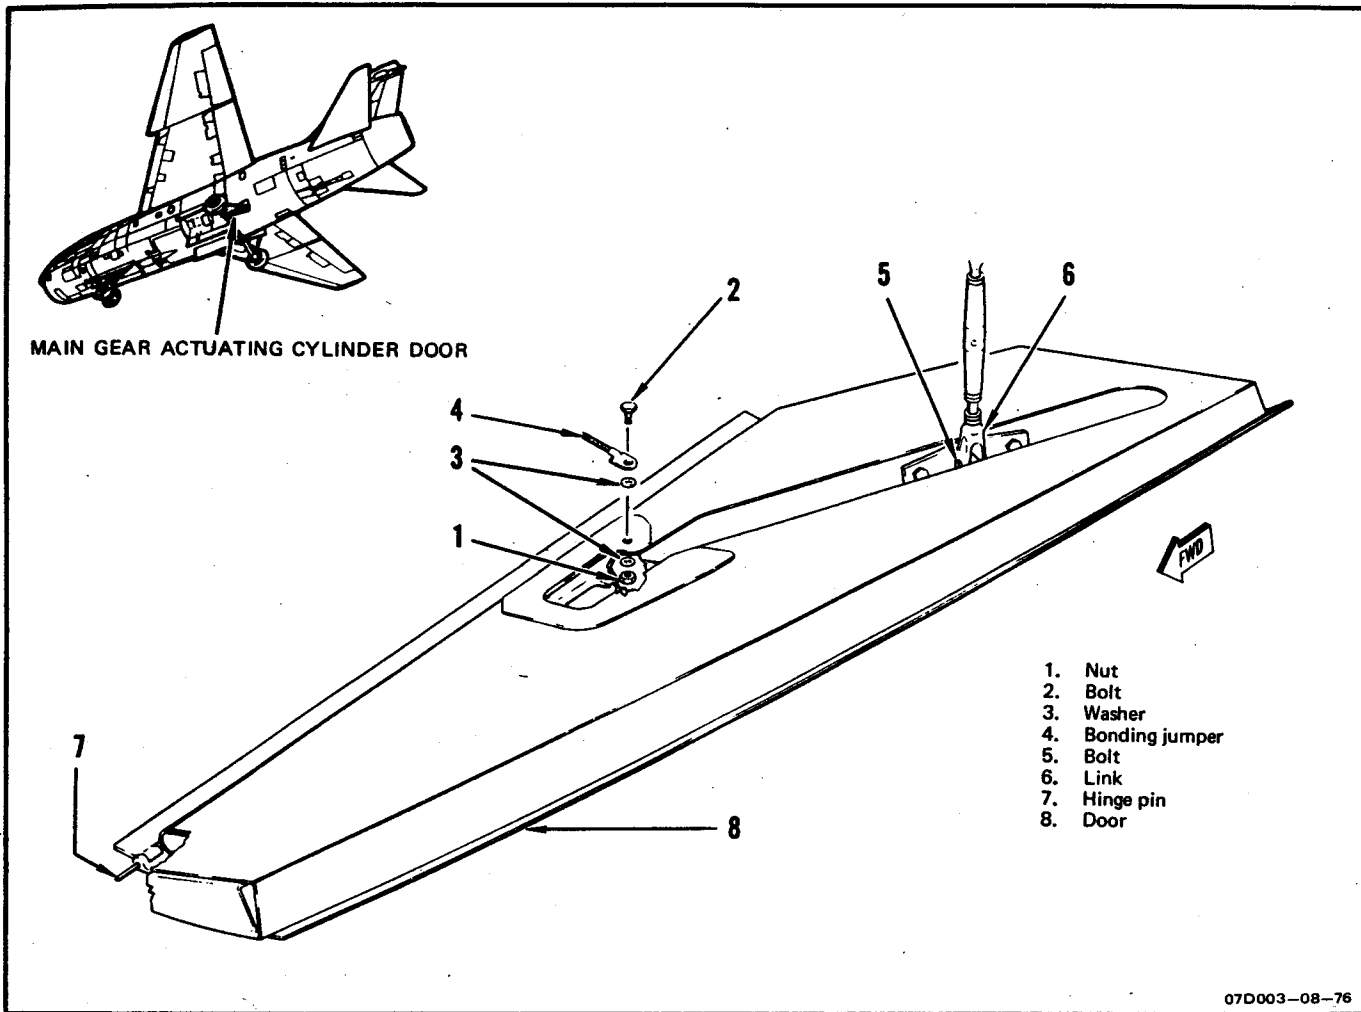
Main Gear Actuating Cylinder Door Removal and Installation
